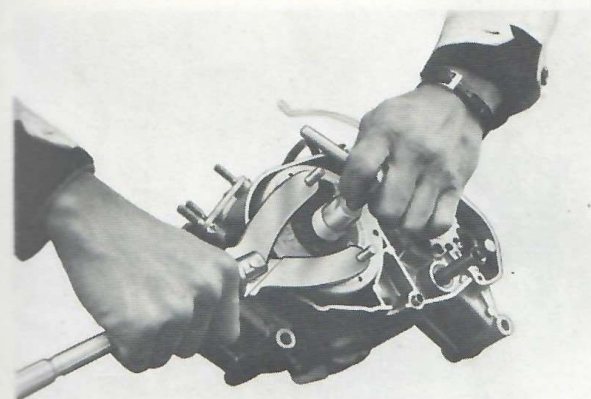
Loosening flywheel rotor with rotor remover (09930-30113) and engine sprocket & flywheel holder (09930-40113)
